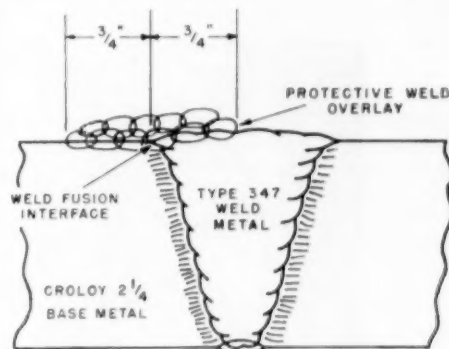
POSITION OF WELD OVERLAY RELATIVE TO FERRITIC-AUSTENITIC WELD FUSION LINE
